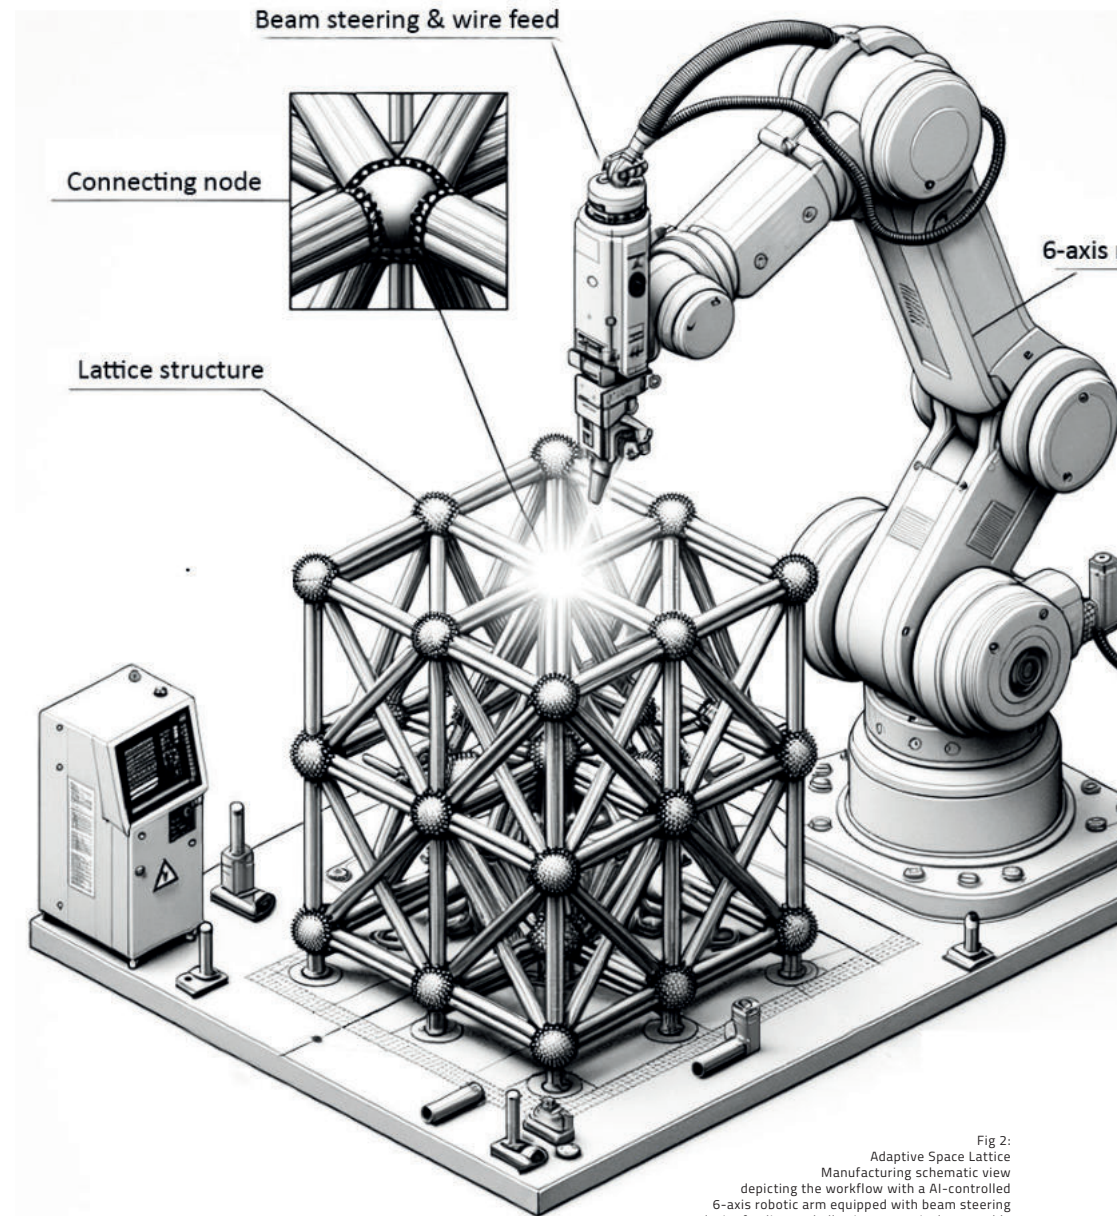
Adaptive Space Lattice Manufacturing schematic view depicting the workflow with a AI-controlled 6-axis robotic arm equipped with beam steering and wire feeding tool allowing to precisely assemble solids rods by laser spot welding to form a lattice structure. This image was created with the assistance of DALL-E 3.
